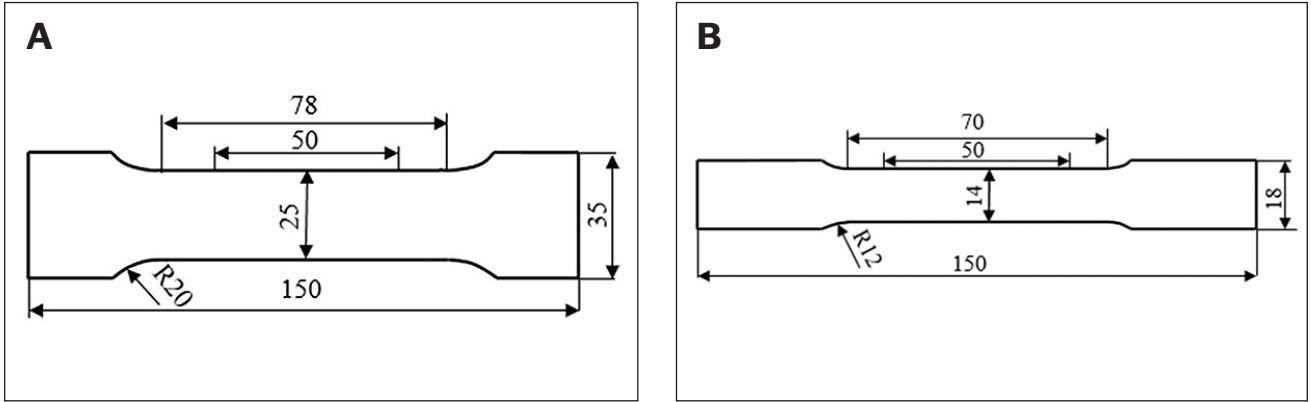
Schematic diagram of tensile specimen: A – Vertical weld direction; B – weld section direction.
